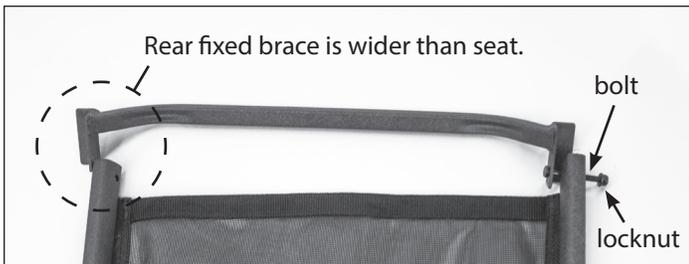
Insert 1/4-20 x 2-3/4" bolt
